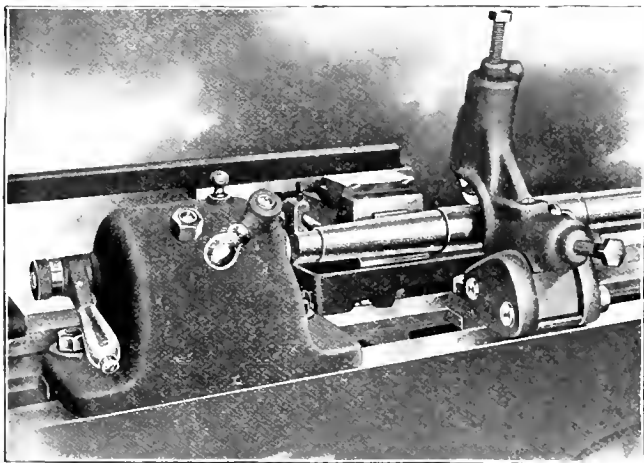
Taper Turning Attachment for Lo-swing Lathe.
